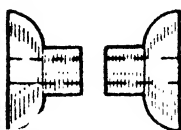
SINGLE-SIDED WHEELS FOR FORMING CURVED AND TAPERED MOULDINGS
